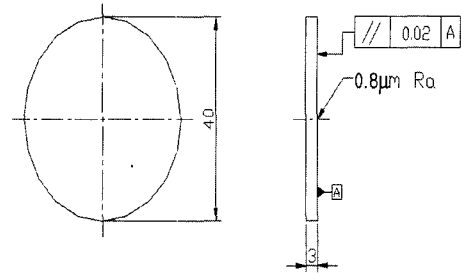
Shape and dimension of corrosion test specimen (unit : mm).
